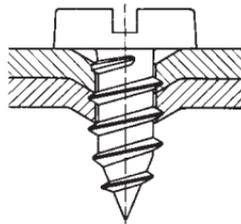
Fastening with pierced or extruded core hole (for thin sheets)
